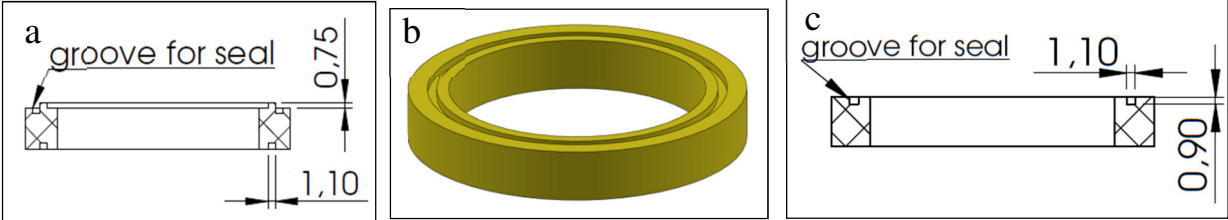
a: Spacer rings with edges; b: 3D model of the spacer ring; c: simple final spacer ring.
